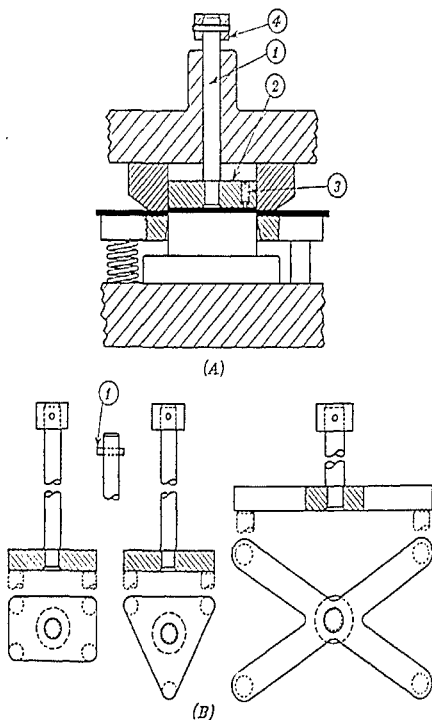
Knockout design: (A) for inverted compound dies; (B) knockout plates.¹¹
